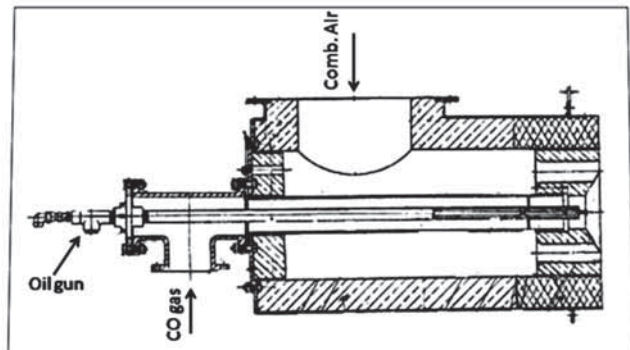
Cross-sectional view of pre-modified dual fuel burner for CO gas or oil firing
